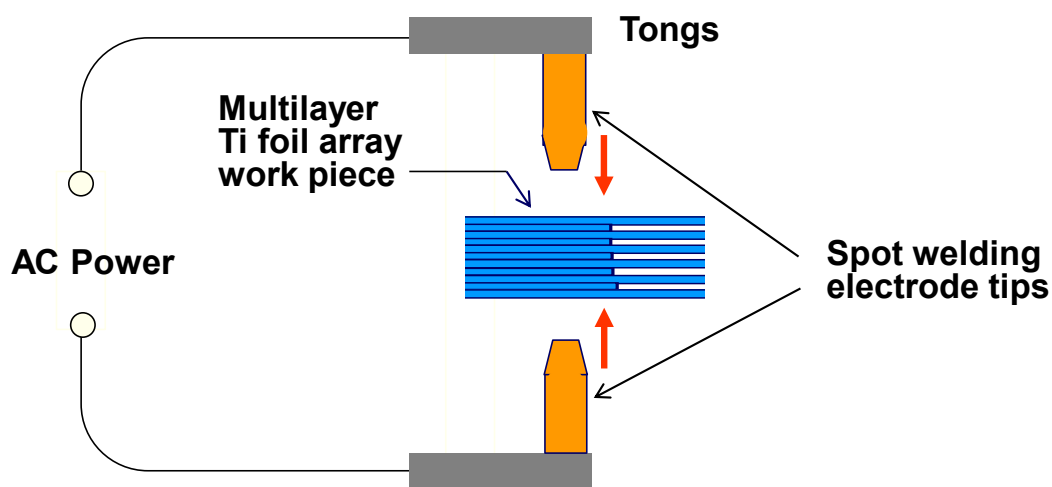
Basic configuration of resistance welding of short and tall Ti foil multilayer assembly.
